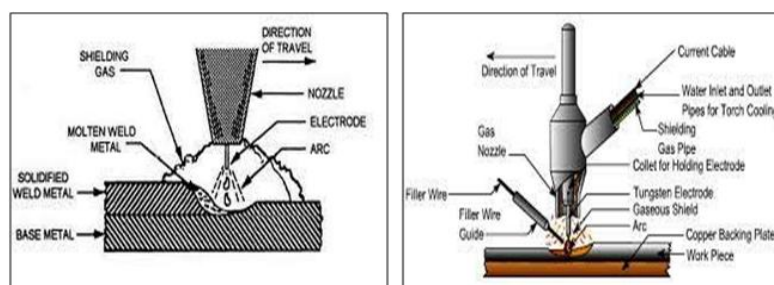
Shielded Metal Arc Welding (SMAW) Figure 4: Tungsten Inert Gas (TIG) Welding
